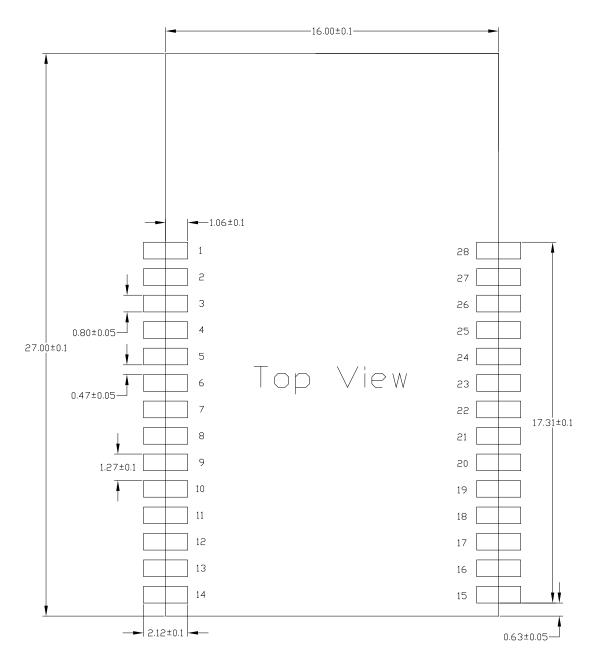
DFZM-E82xx recommended PCB footprint (in mm)
